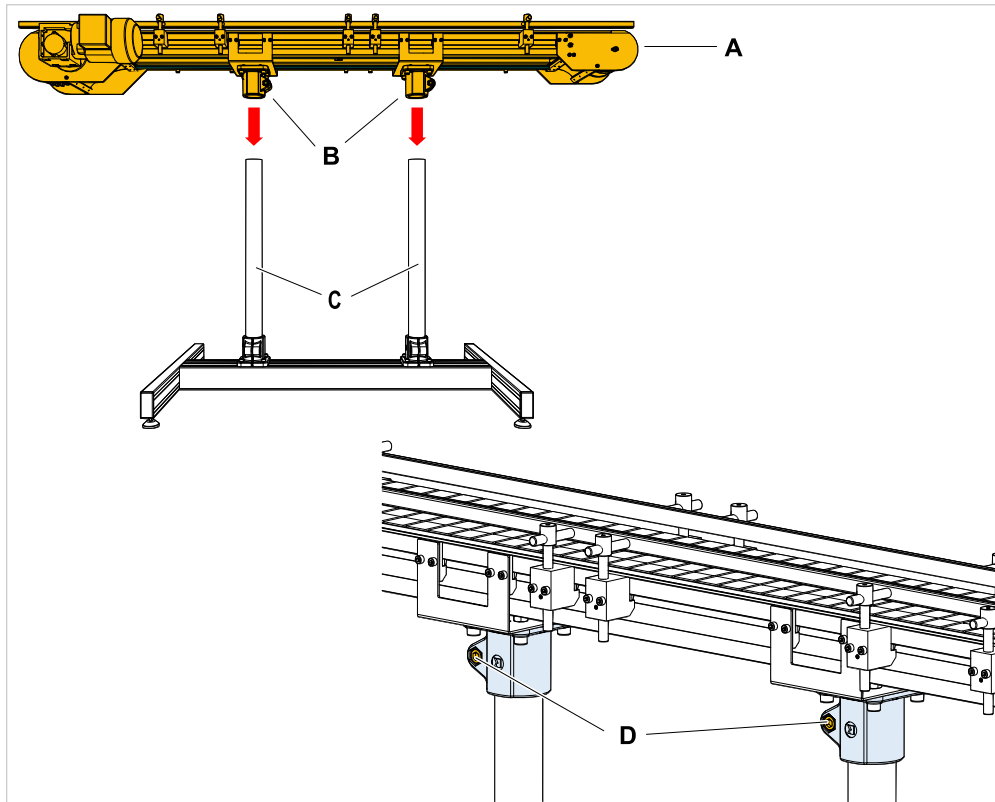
Installation example for CB conveyor (A = Belt conveyor, B = Clamps for alignment and fixing of the belt conveyor, C = Support stand, D = Clamping bolts).
